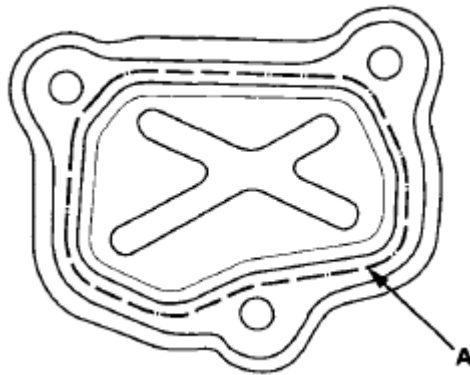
Identifying Cam Chain Auto-Tensioner Broken Line
